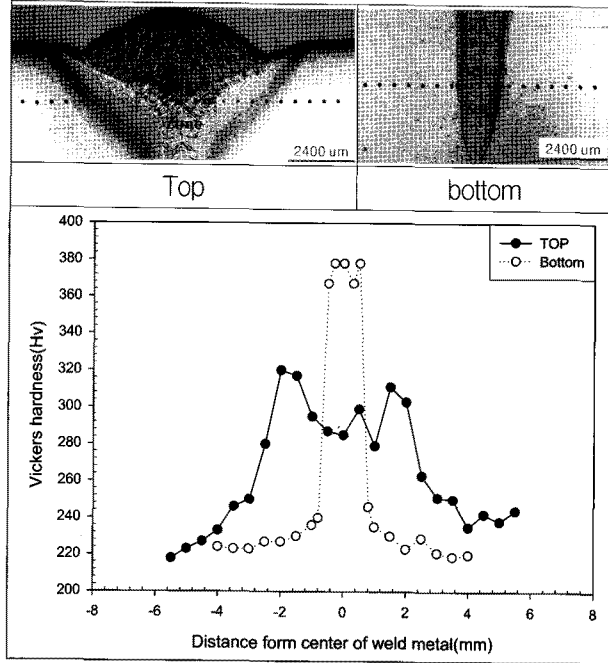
Hardness and macrostructures of weld metal after Hybrid welding
